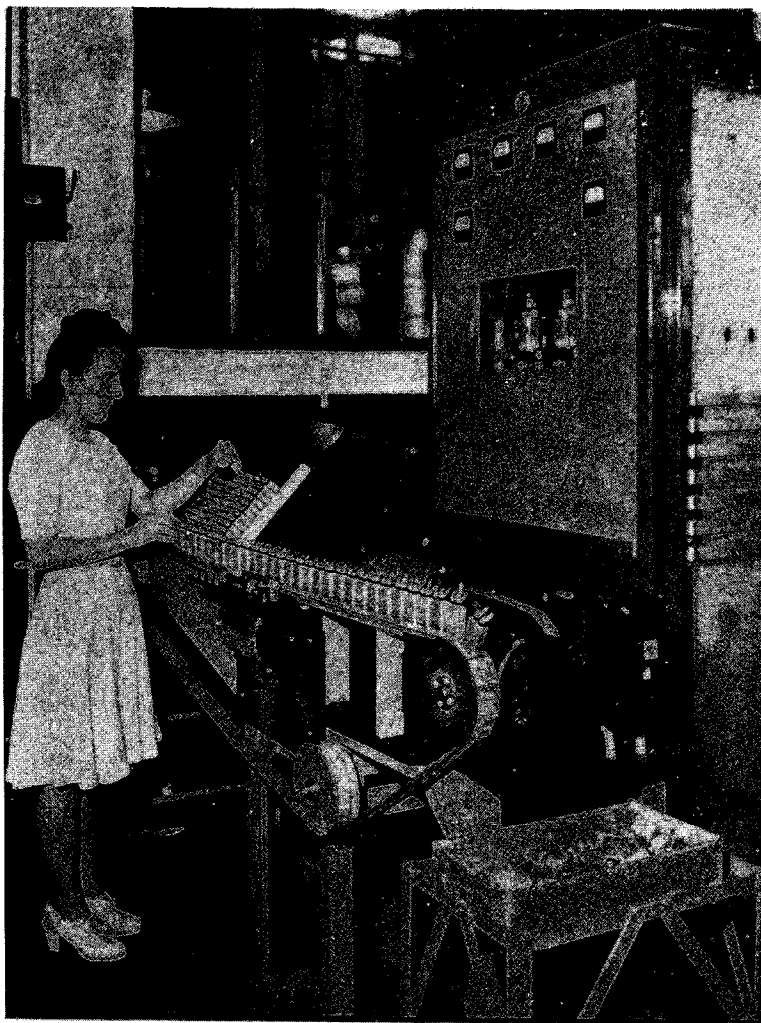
Soldering with induction heating, using a specially designed coil. Courtesy of RCA and Electronics Magazine, Reference 16.
